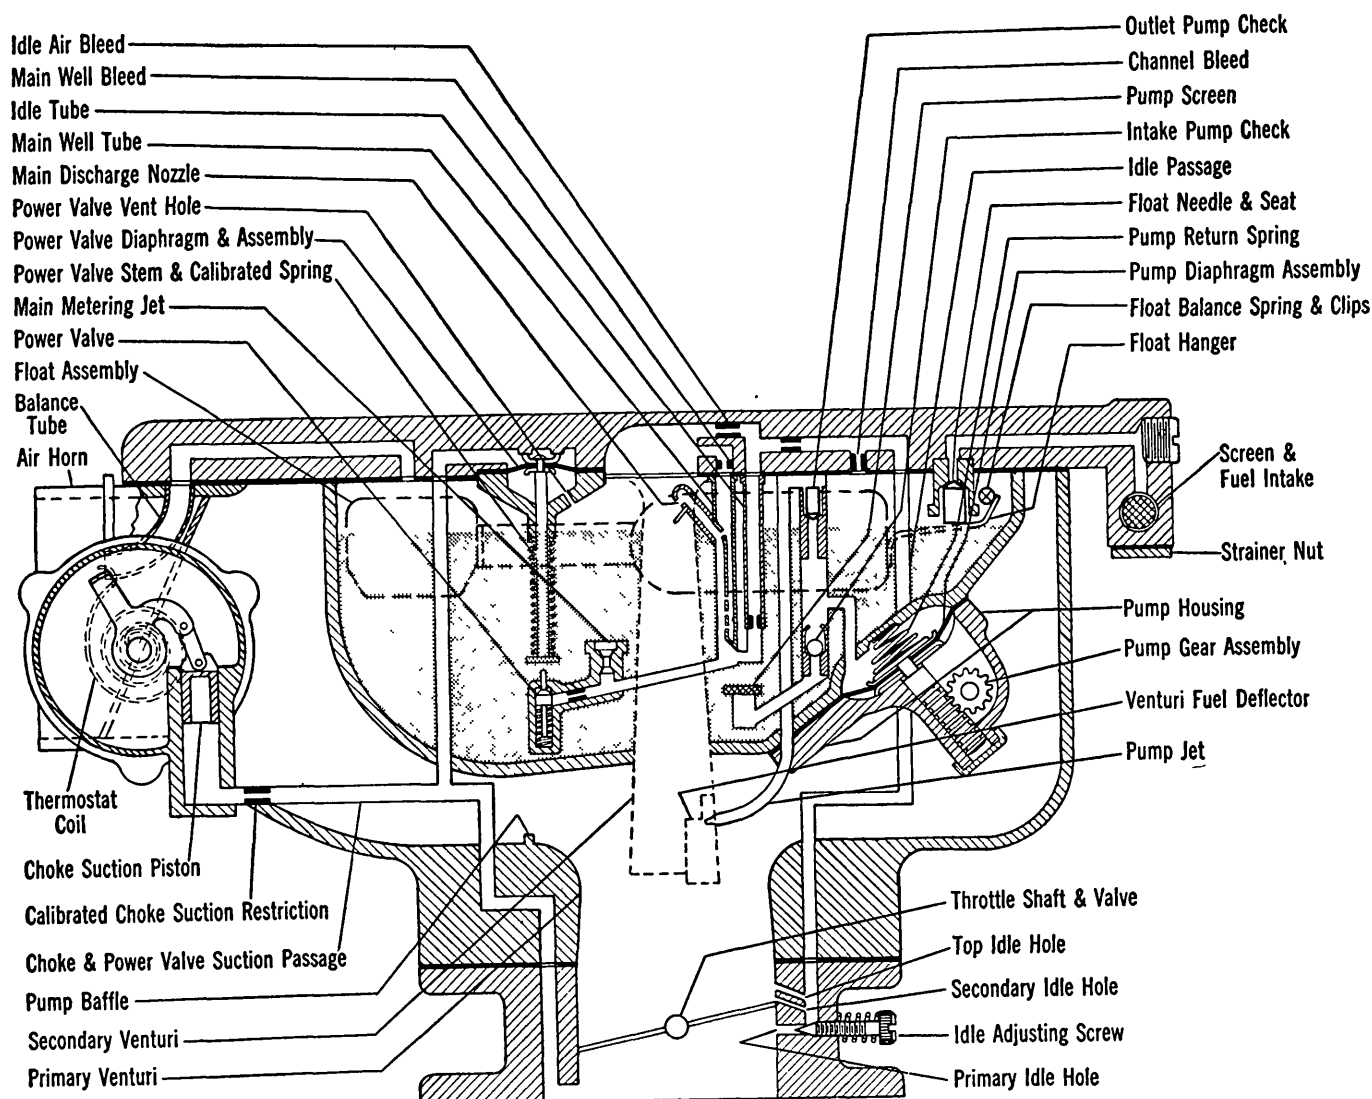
Rochester Model AA carburetor used on 1949-50 Oldsmobile Rocket engines
